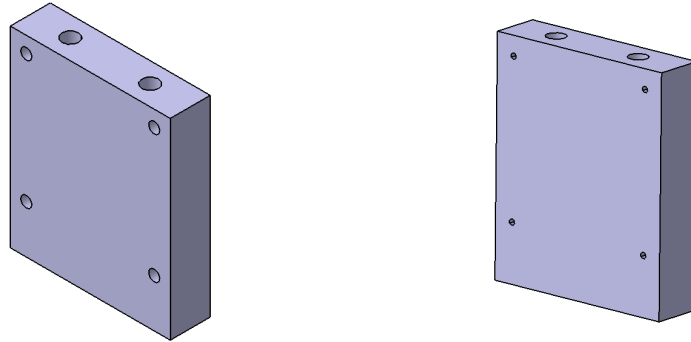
The first block (front view on the left and rear view on the right) will be used to lock the handler and keep it at a certain height. The second support (front view on the left and rear view on the right) is required to attach the handler to the workbench
